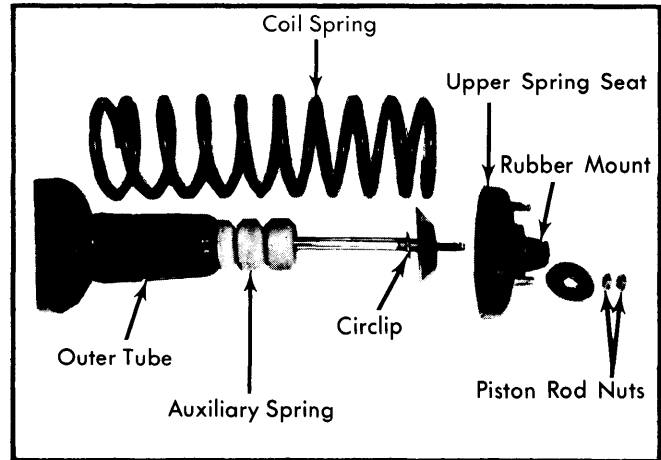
Exploded View of BMW Rear Suspension Strut Assembly — 320i Shown
